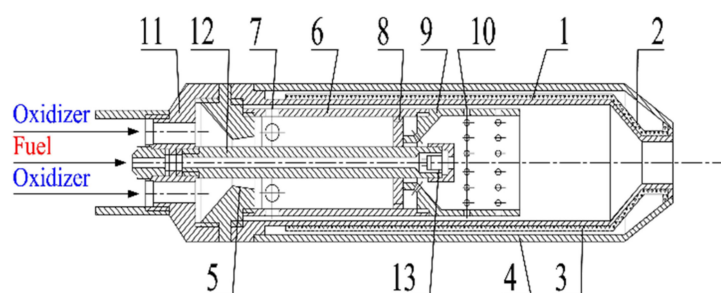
Unified burner, equipped with capillary-porous cooling structure (coating) and high-pressure vortex chamber with supersonic annular nozzle: 1—combustion chamber; 2—nozzle device; 3—capillary-porous coating; 4—casing; 5—nozzle; 6—vortex chamber; 7—outlet openings for cold flow removal; 8—outlet openings for hot flow removal; 9—fore-chamber; 10—oxidant supply openings; 11—main channel; 12—fuel supply pipe; 13—nozzle.
